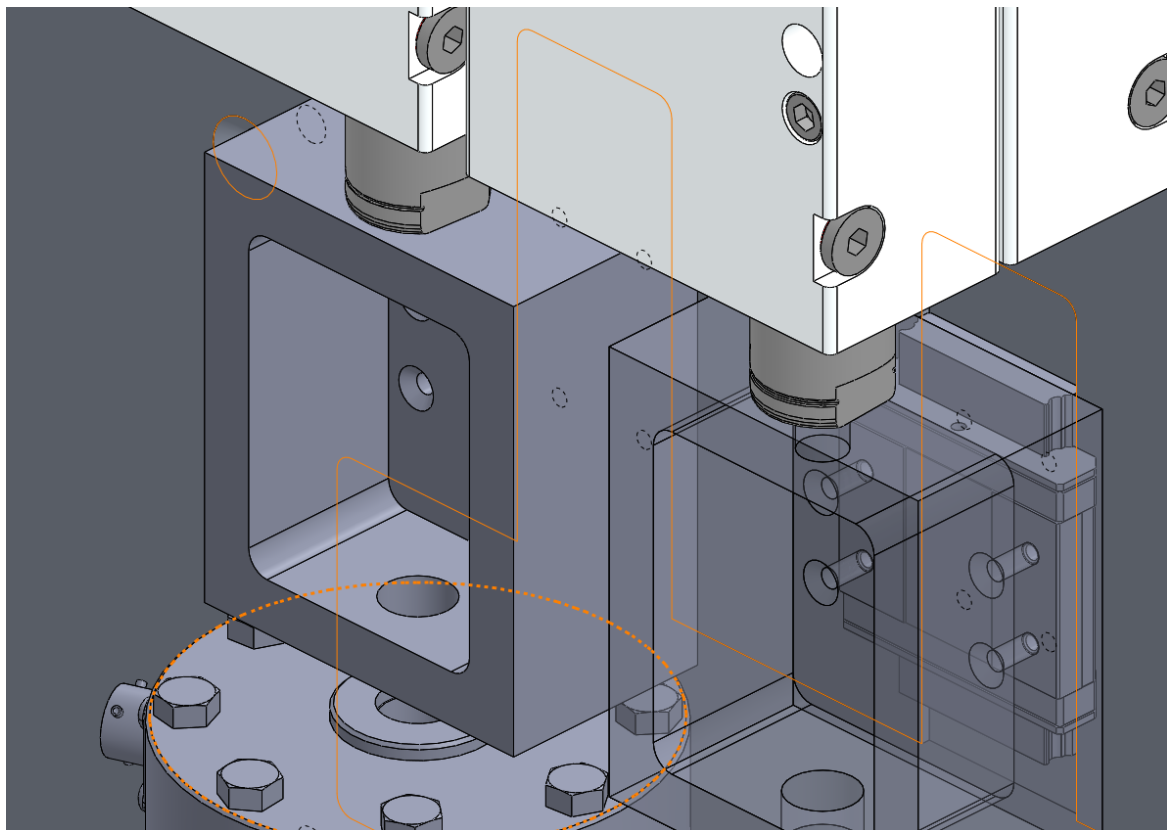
Required support for slider of the drive comprising a linear bearing and the coupling
